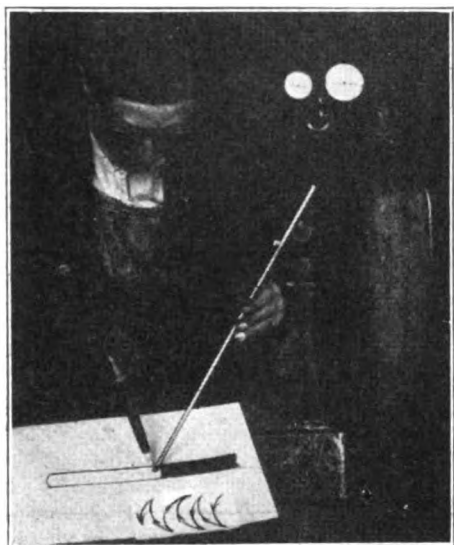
Indicates General Movement of Flame When Welding is to the Right.
